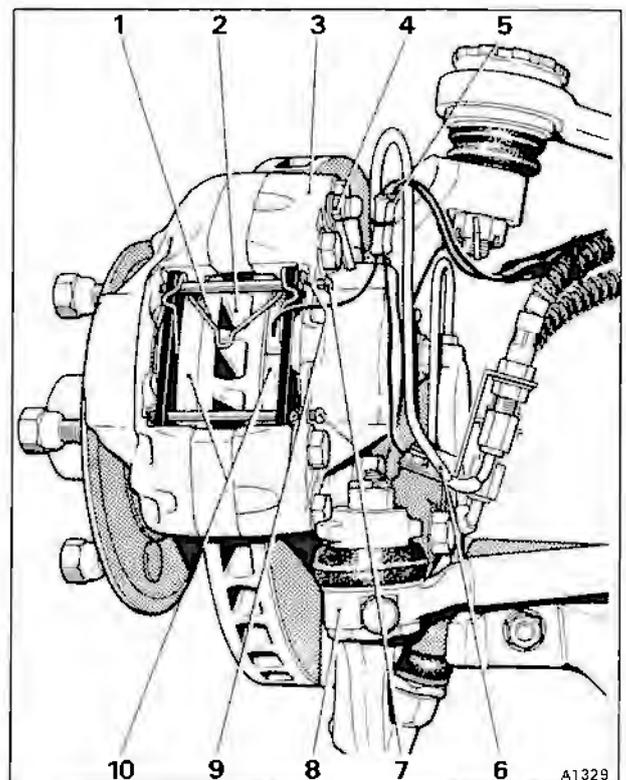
Front wheel brake caliper (cars not fitted with anti-lock braking)
